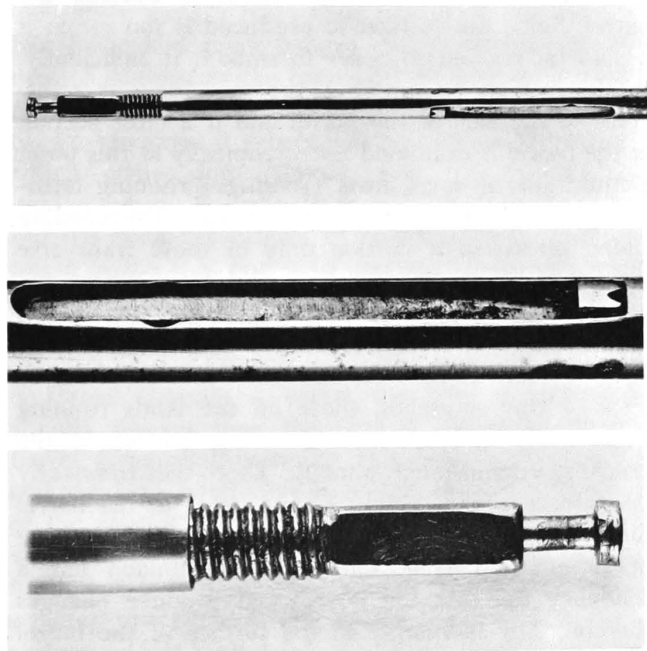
The hook cutter. Top: Section of cutter for .22 caliber. Middle: Enlarged view of hook section. Bottom: Enlarged view of adjusting screw.
